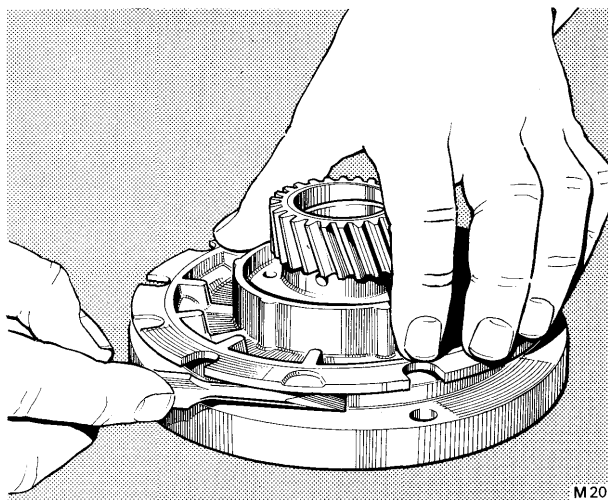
FITTING THE PISTON TO THE CLUTCH COVER
